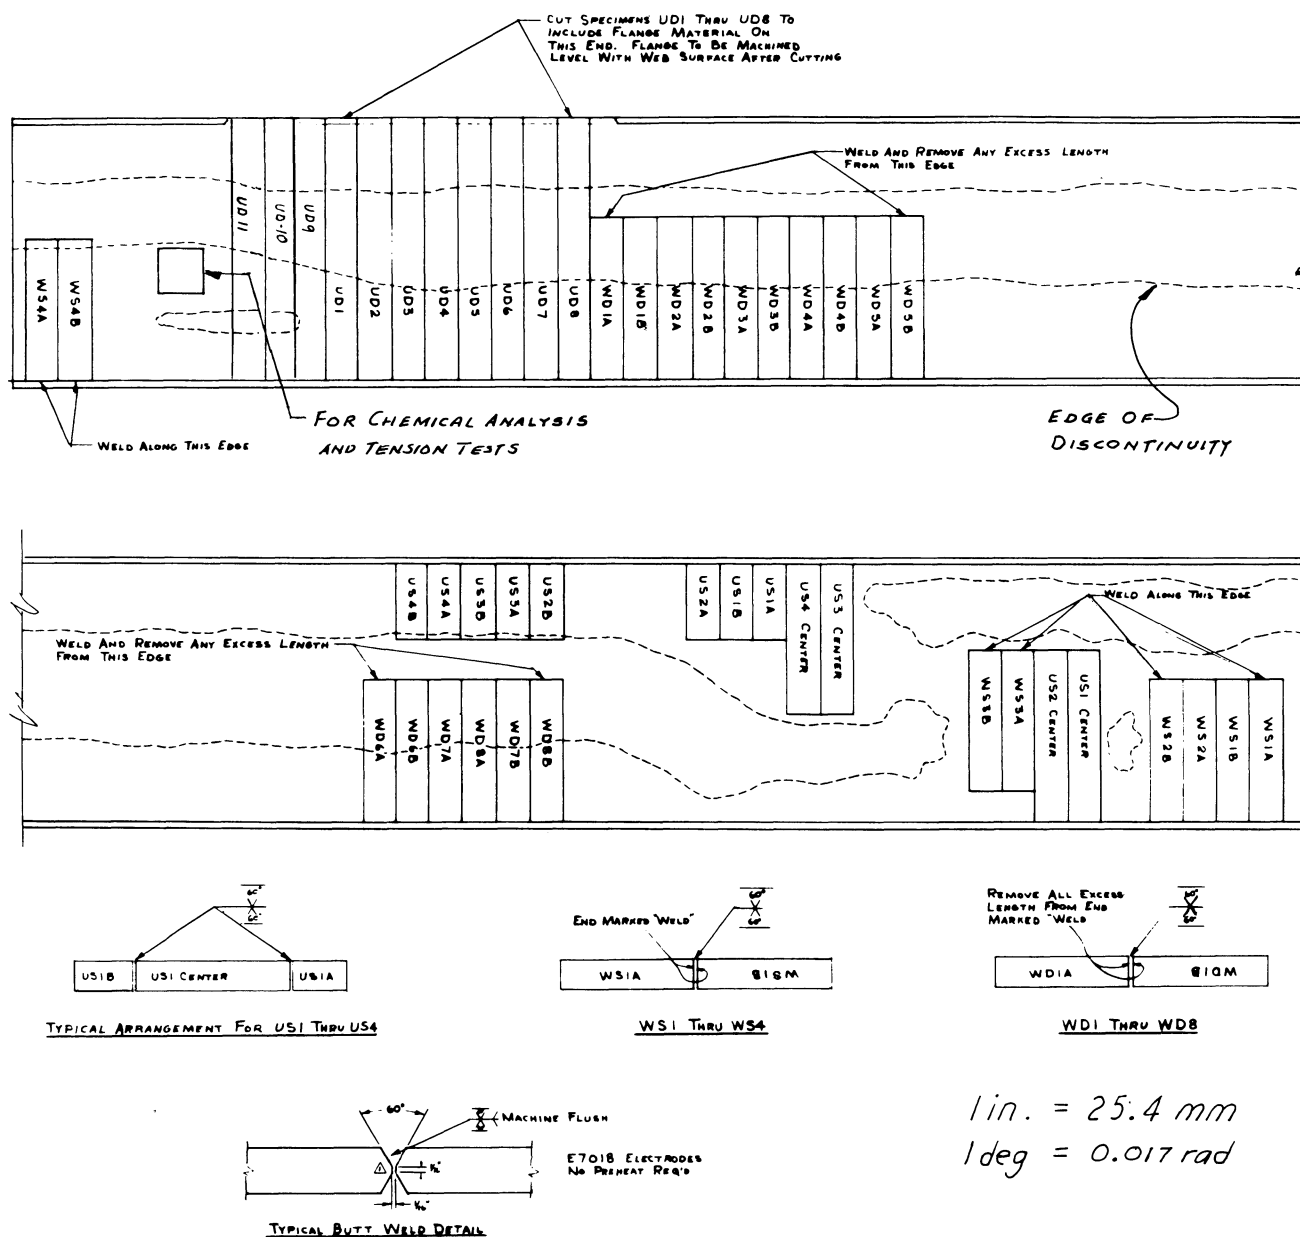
Layout of beam, showing outline of discontinuity and location of specimen blanks
